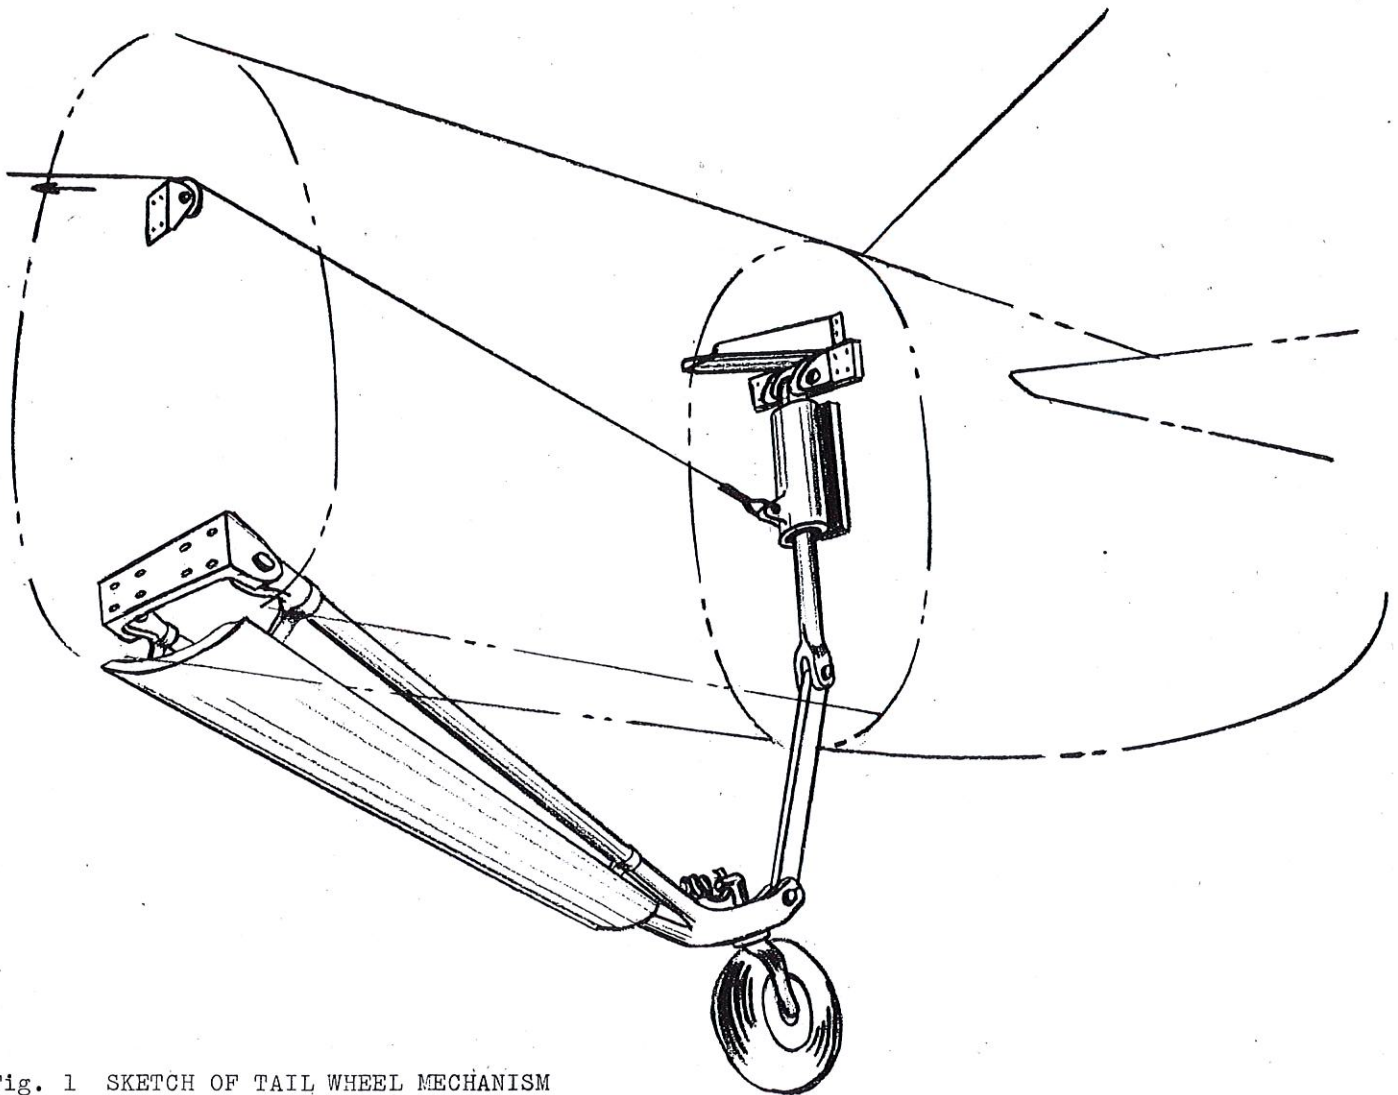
SKETCH OF TAIL WHEEL MECHANISM
